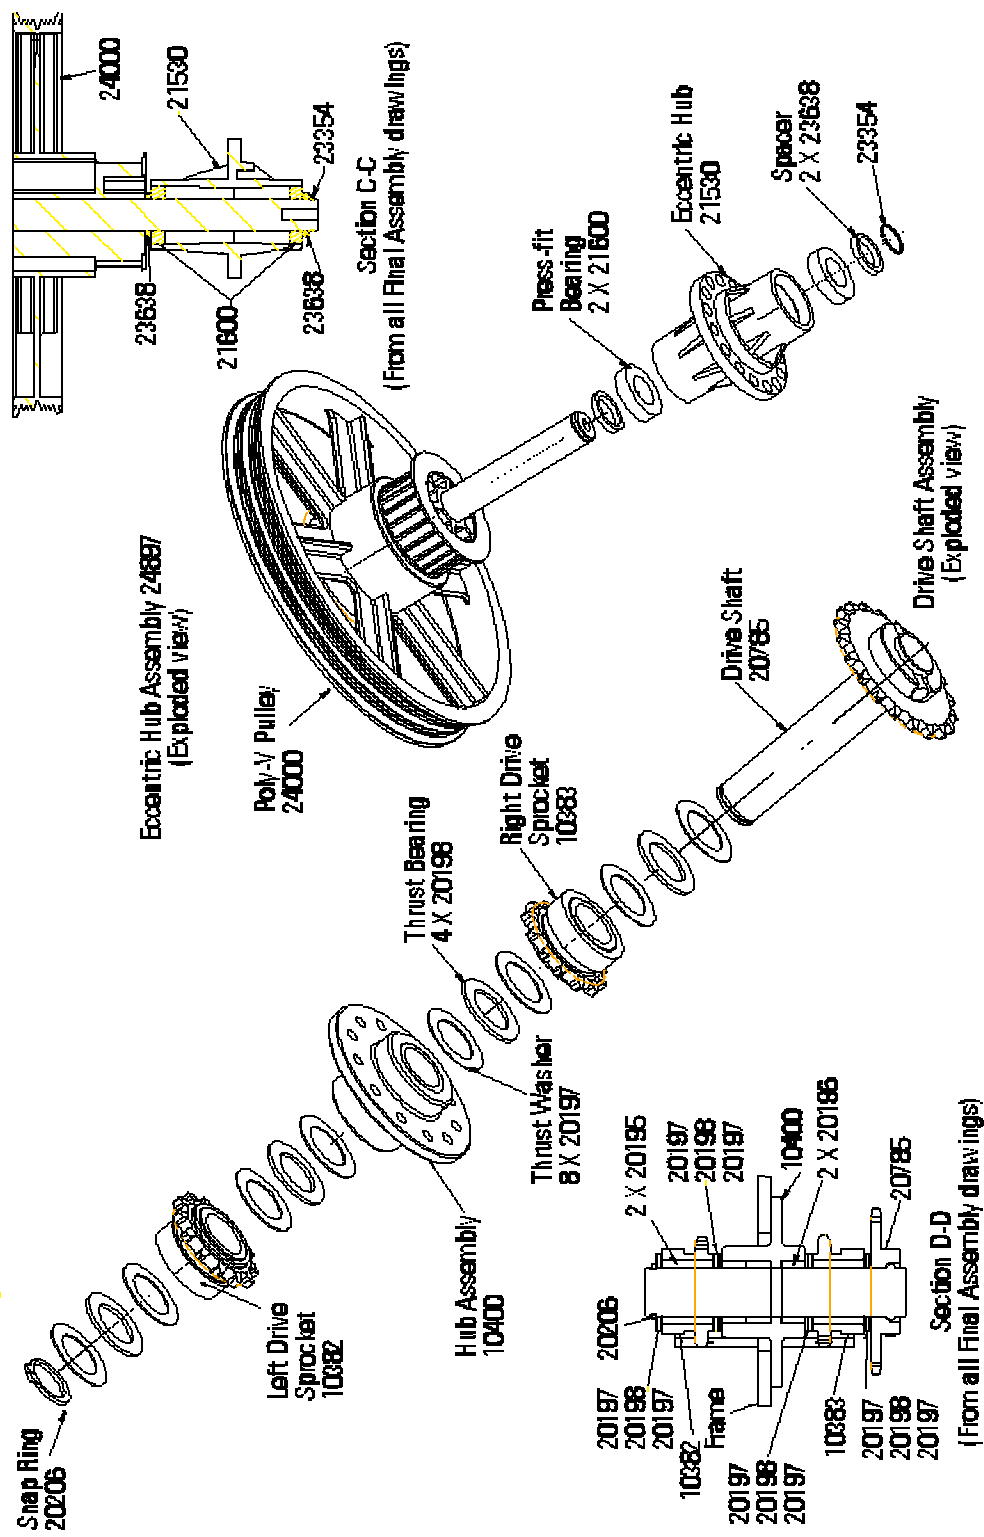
Drive Shaft Assembly & Eccentric Hub Assembly
